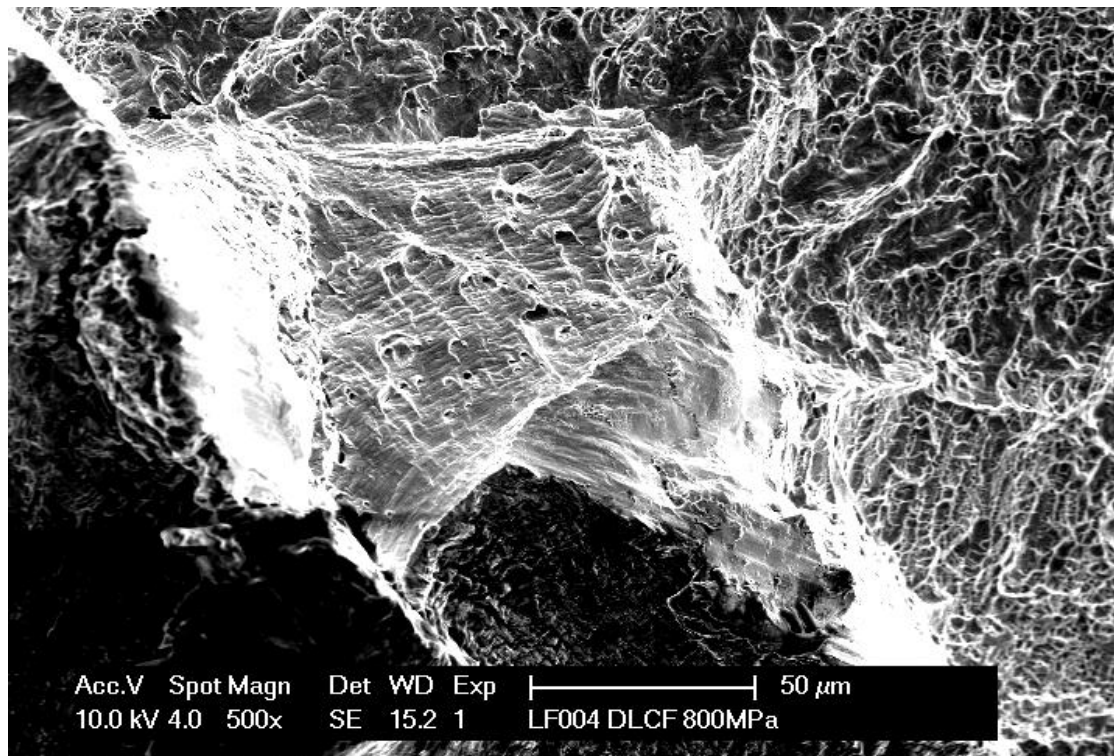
DLCF test specimen LF004, 800MPa, 355 cycles to failure. Surface initiated fatigue crack growth with transition to ductile failure
